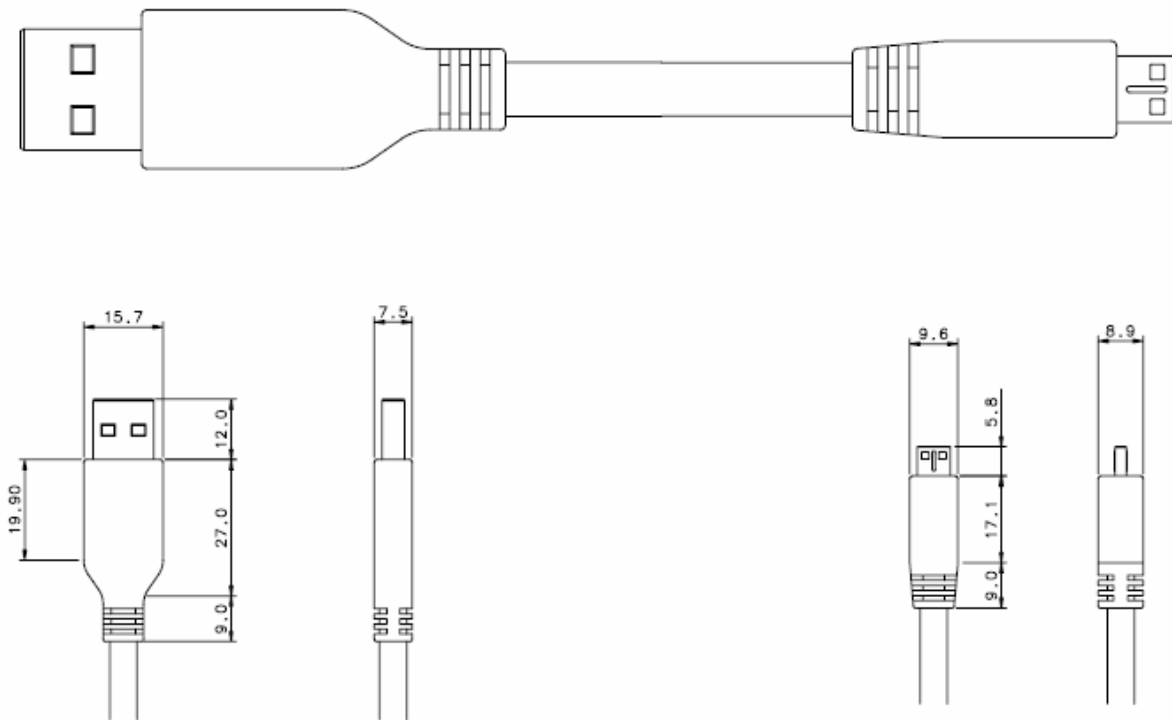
USB 3.0 Standard-A to USB 3.0 Micro-B Cable Assembly
